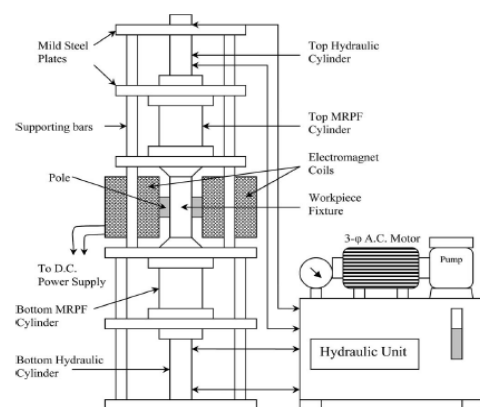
Shown setup of Magnetic abrasive flow Machining [12]
